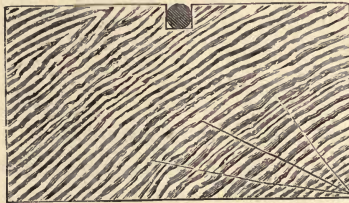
Ex.—Section of Wood with Inlaid Wire.
